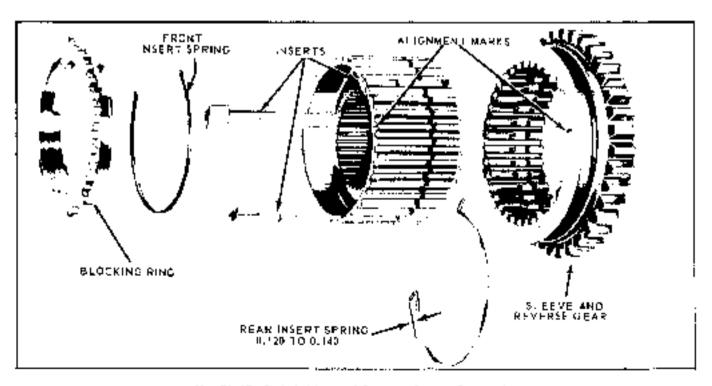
A-17 Exploded View of First and Revene Synchronizer
